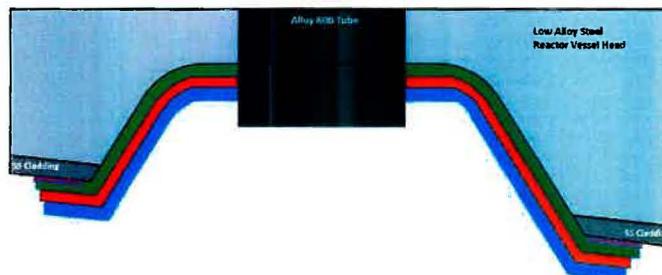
Final Temper Bead weld layer illustration.
